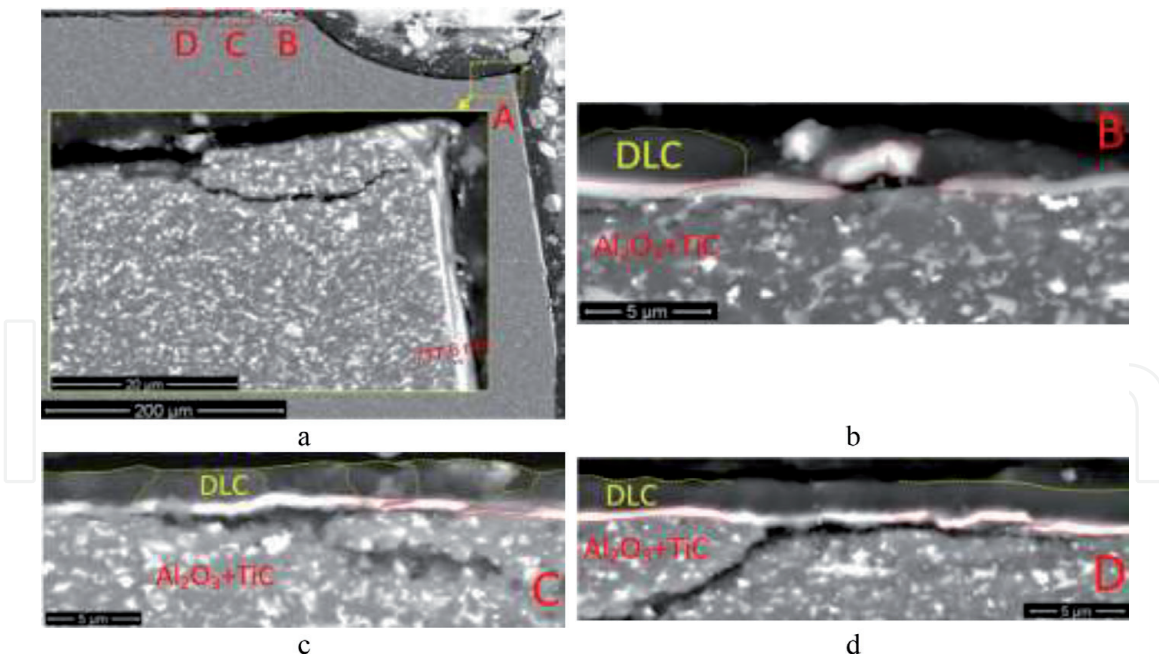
Investigation of the fracture pattern on a cross-section of the tool with the DLC-2 coating [68] (SEM). General view and a crack passing into a ceramic substrate (a), tearing out of a coating fragment (b), cracks in a coating turning into a substrate (c, d).
